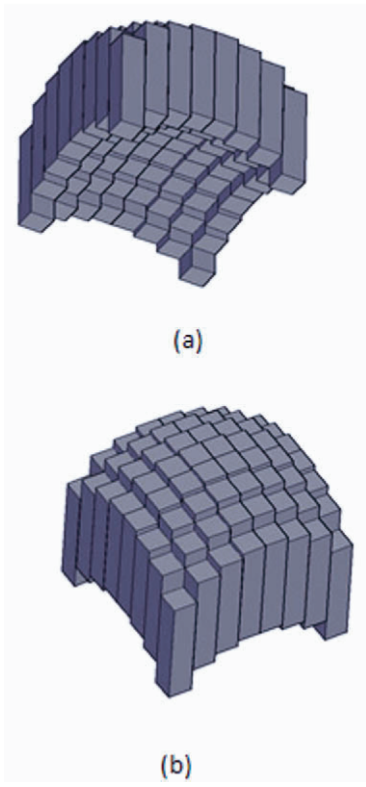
Example for pins' arrangements for a concaved part, (a) upper and (b) lower die halves
